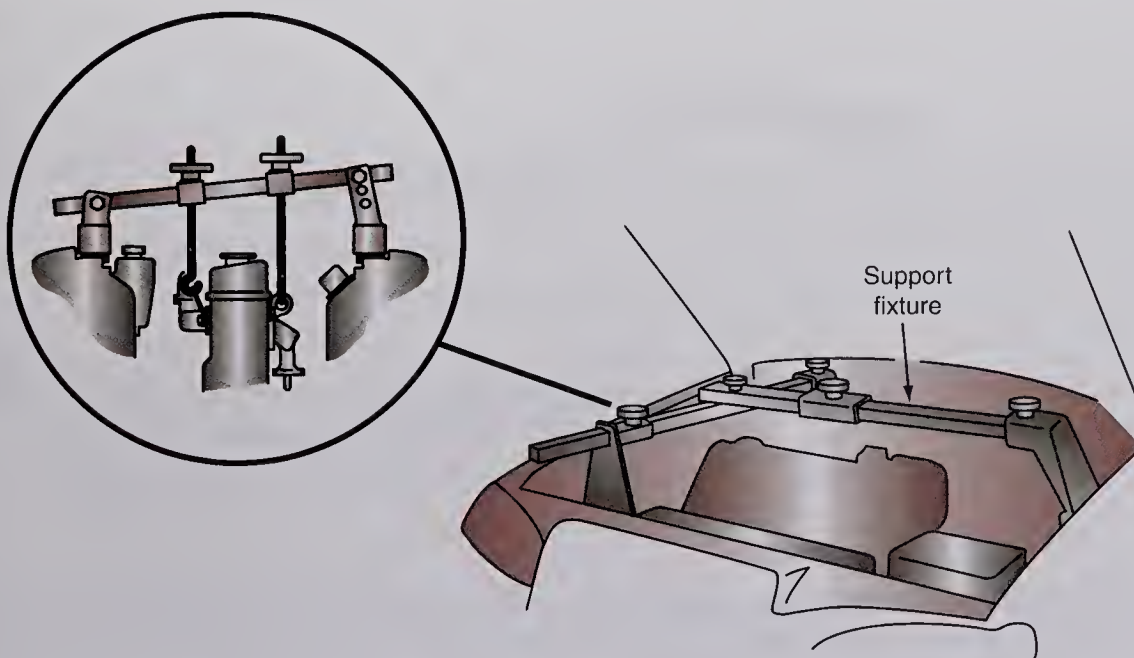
Engine support fixture installed to support engine and transaxle prior to cradle removal.
